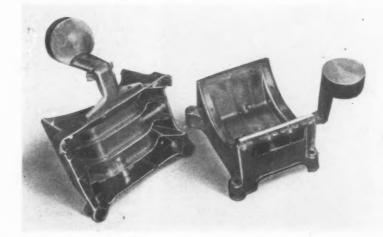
Views of Base Support Castings for the Crankcase in Fig. 6, Showing the Thin Ribs on the Under-side and the Method of Gating. Ejector Pins Act on the Lower Surface of the Flanged Edge
